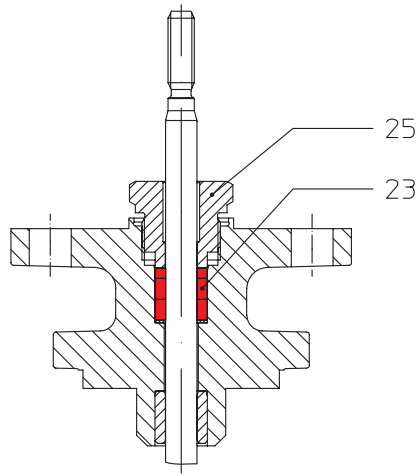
; Nominal diameter DN65; Nominal pressure PN40; Body material 1.4408; Parabolic plug; Kvs 63; GLP; Stem sealing PTFE-V-ring unit; Actuator ARI-PREMIO 5 kN.
